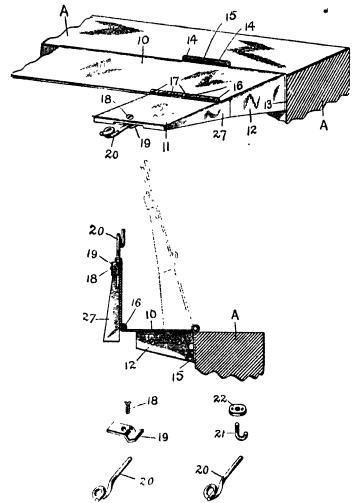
Houghton's Pressed-Steel Thread Board, 1901.
